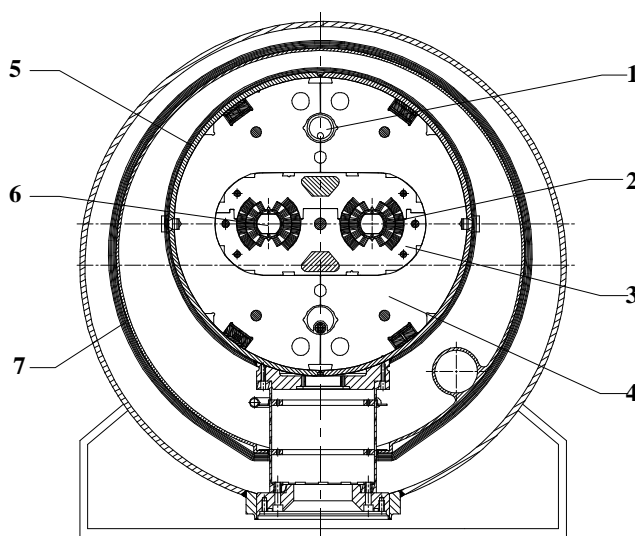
LHC main dipole cross section, 1 - heat exchanger tube, 2 - coil, 3 - aluminium collars, 4 - iron yoke, 5 - stainless steel cylindrical vessel, 6 - beam tube, 7 - thermal shield.
